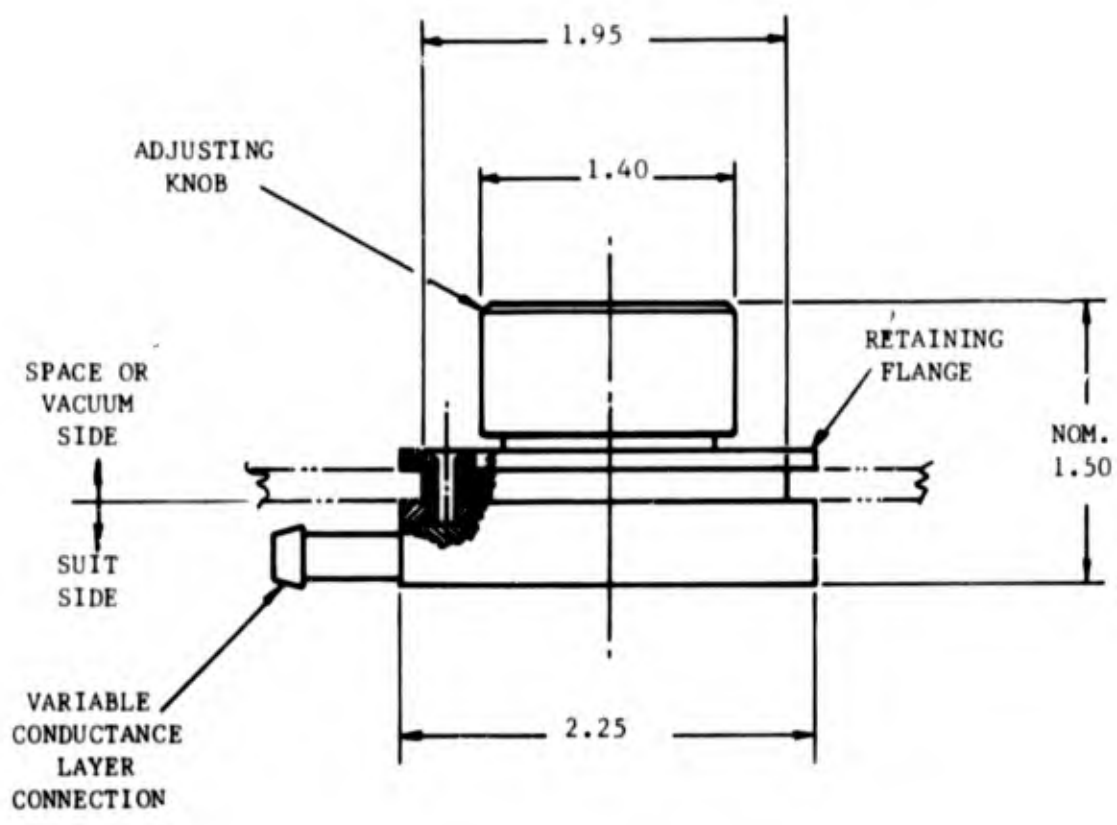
PRESSURE REGULATOR (DIMENSIONS ARE IN INCHES)
